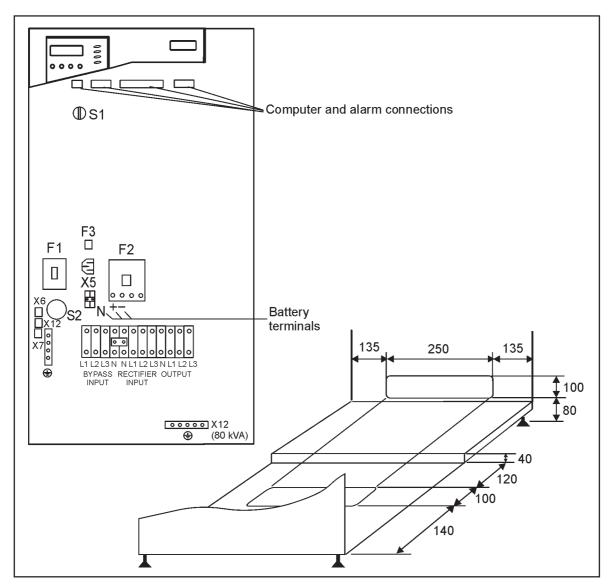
40-80 kVA UPS connection loactions and cable routings
